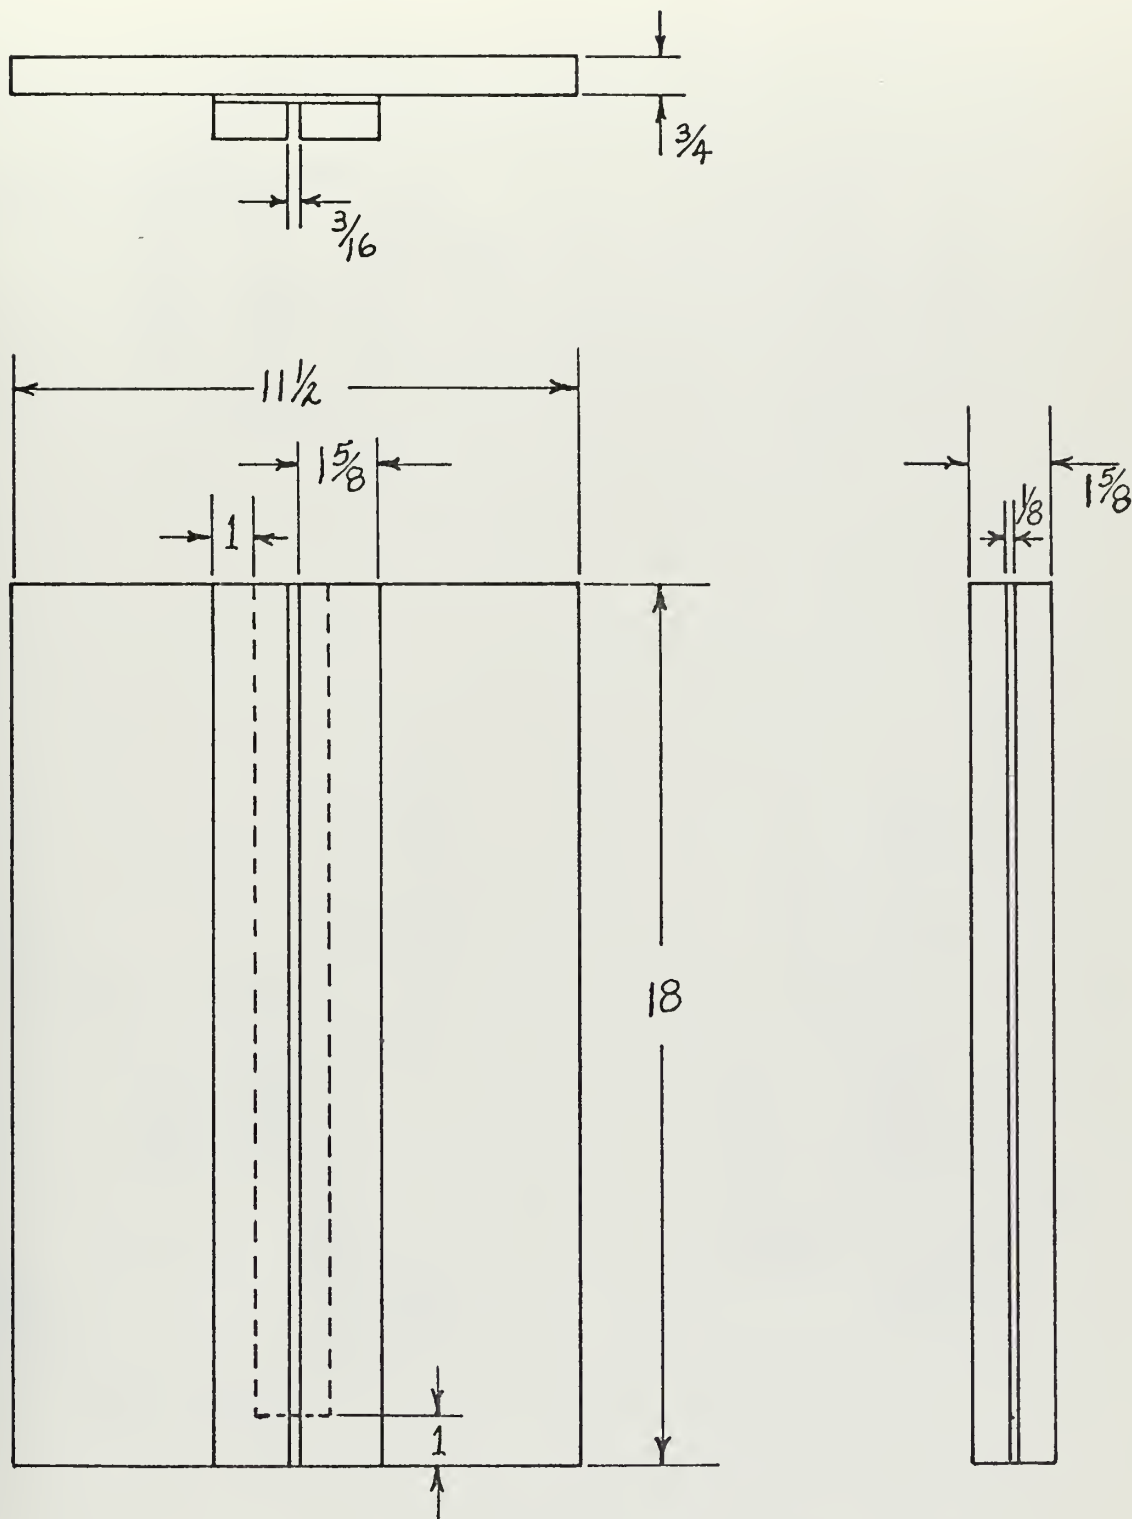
Detail drawing of the wooden wall mounting bracked used in the laboratory with the NPS Vane Shear Apparatus
